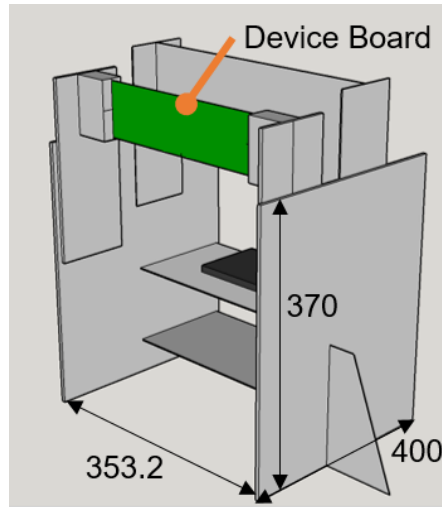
Schematic illustration of the fixture of the device board. The unit of lengths is [mm].
